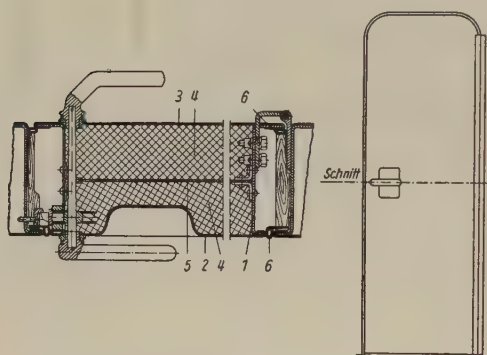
Swing door of machinery compartment; section at door knob level. Scale 1 : 5.
